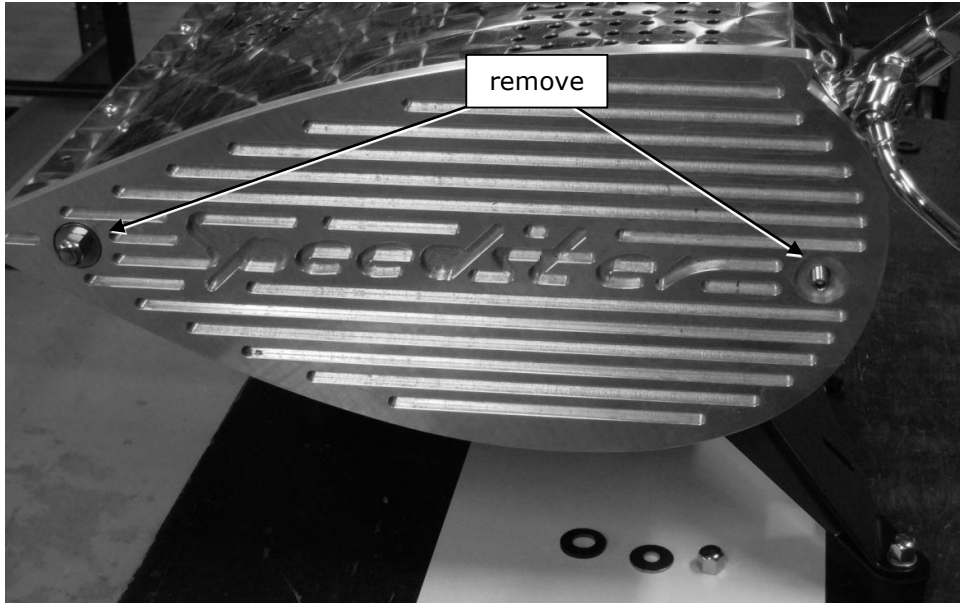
To remove side panel loosen the 2 nuts with a 13 mm spanner. Note: the side panel shown in the picture is not polished.
